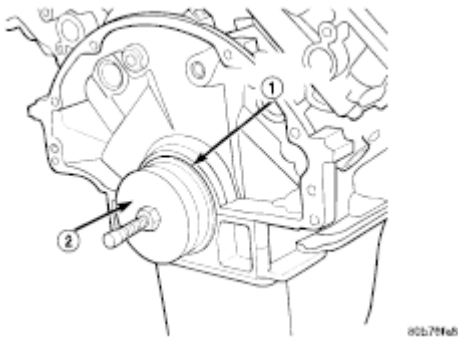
Removing Crankshaft Rear Oil Seal Using Special Tool 8506
